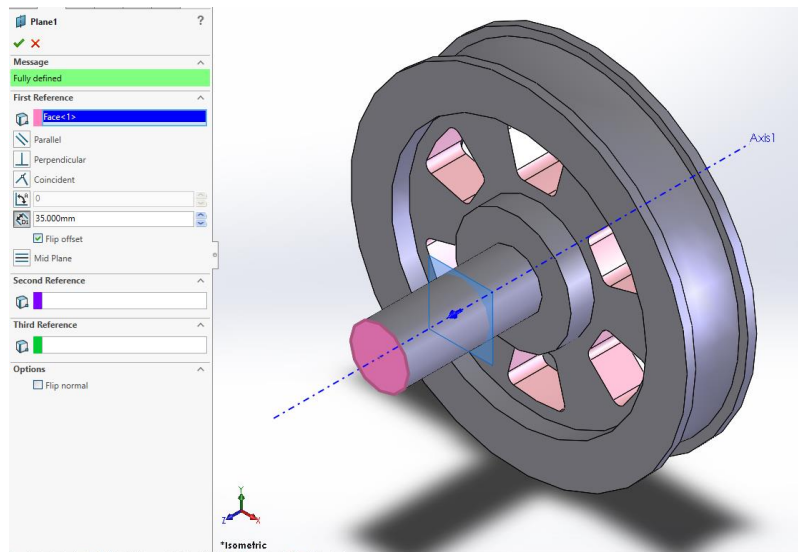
Offsetting Parallel Plane from Front Surface of Shaft
